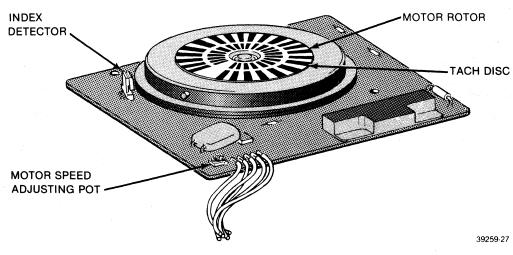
BRUSHLESS SPINDLE MOTOR ASSEMBLY
